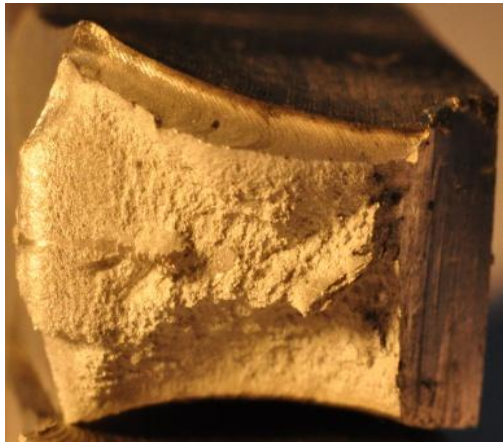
₁. Macrophoto. fracture (800rpm,100mm/min)
